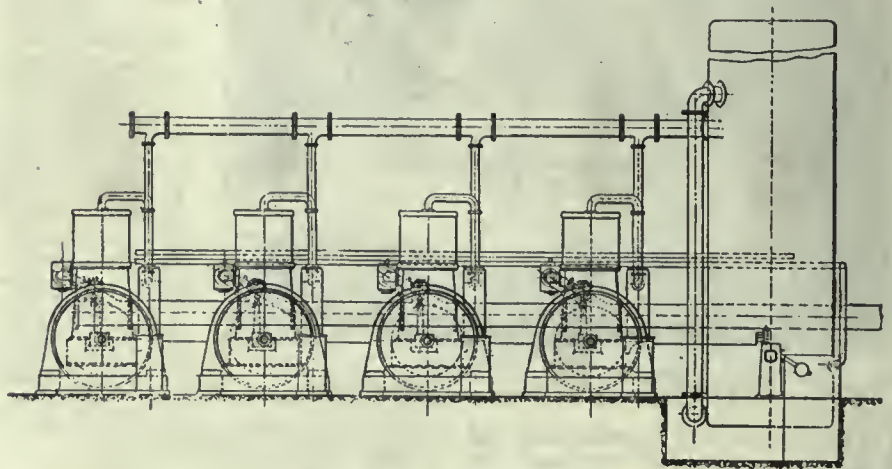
FOUR SCOTT COMPRESSORS WITH PNEUMATIC ELECTRIC CONTROL IN LARGE ENGLISH PLANT.
